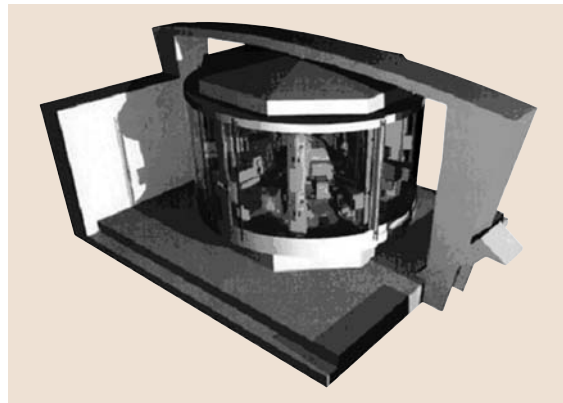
Large product: machine tool (source: A. Breiing, MIKRON, Biel)
